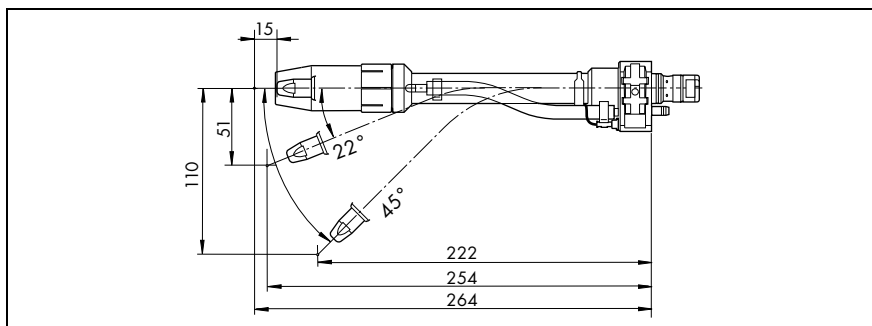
ROBO WH 650/WH 652D (TS) torch neck geometry
